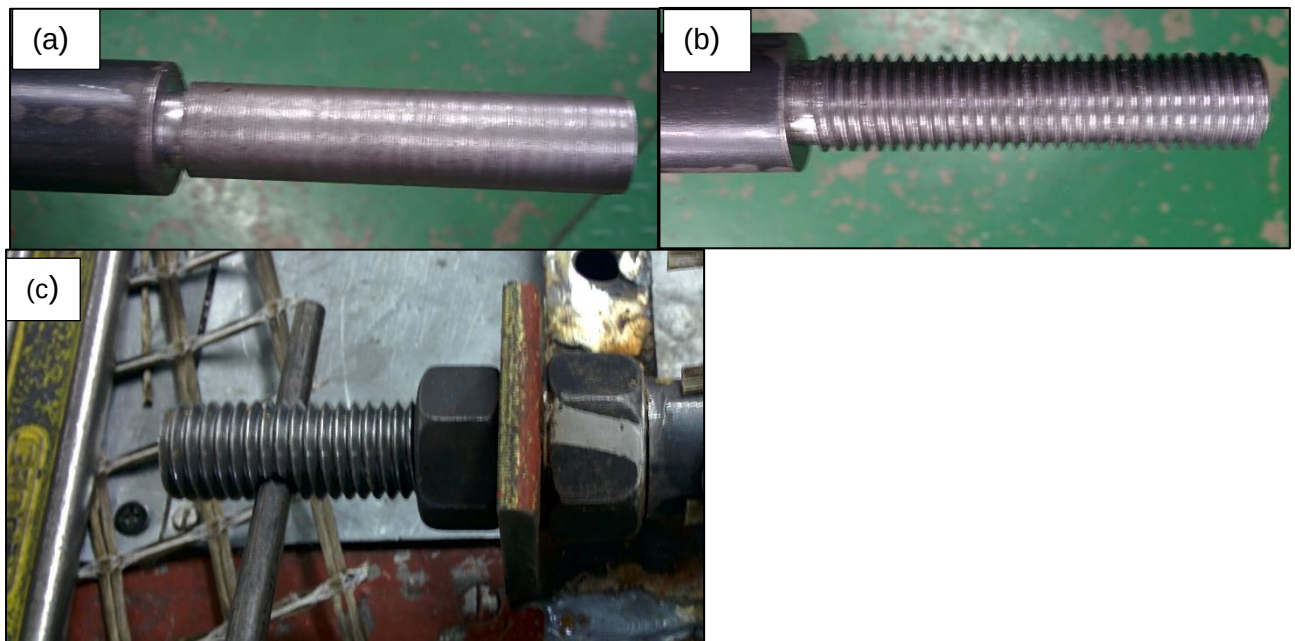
Stages of development: (a) Rod machined down to 18mm at ends (b) thread cut into reduced end (c) hole drilled into ends and metal rod inserted, nuts added on either side of the angle support.
